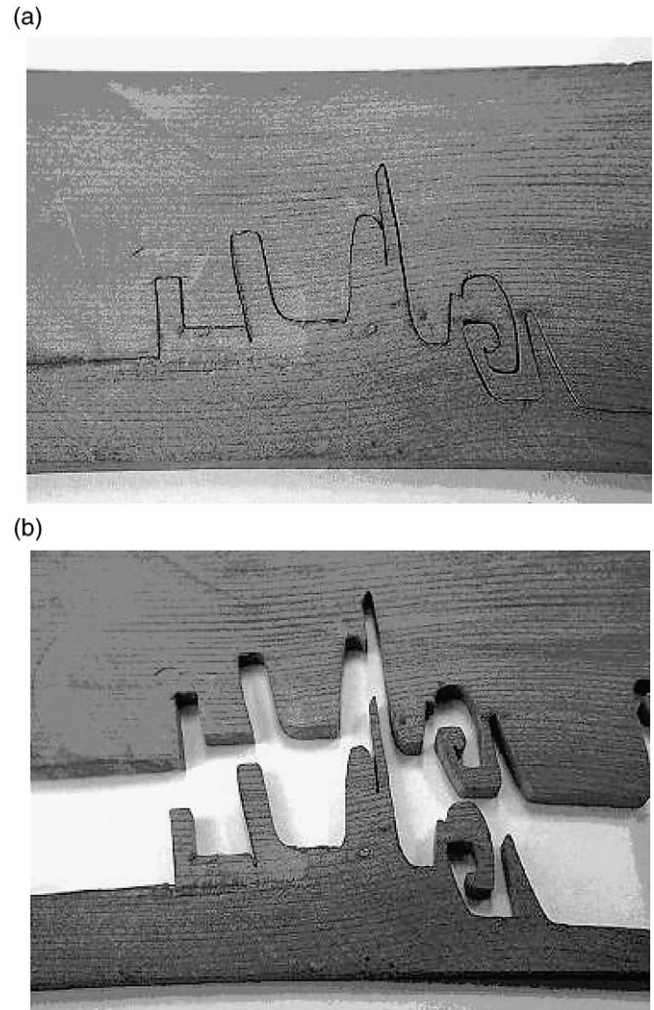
A cedar slat machined by the diamond wire saw. (a) Trace of wire cut path; (b) Separation of two pieces after cutting.
